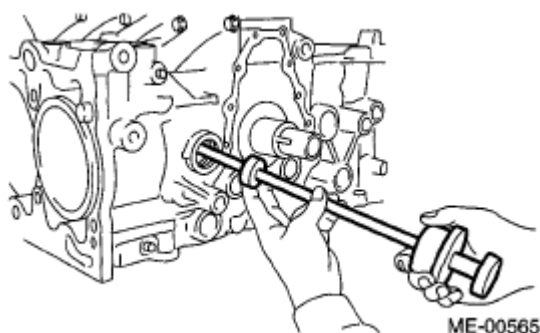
Drawing Out Piston Pin From Pistons Using ST
